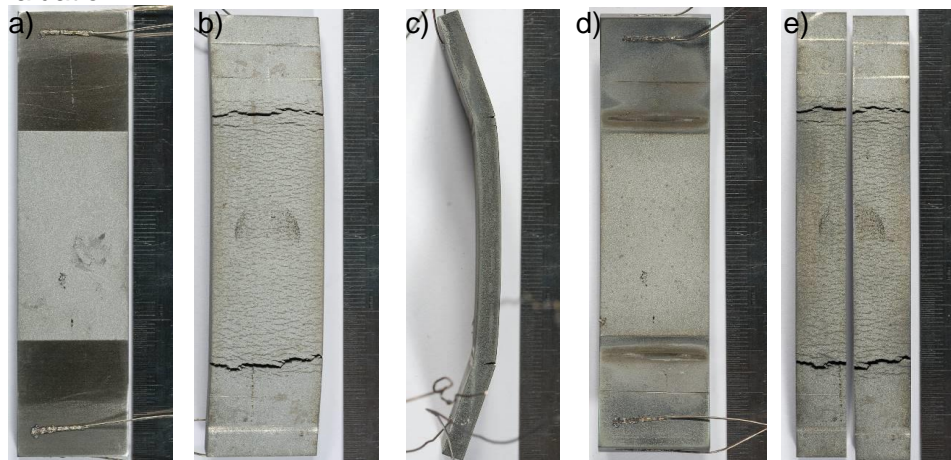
Cr-BS2 – a) As-coated and welded with probes; b) Bottom view – coated surface under tension; c) Side view after the test – reduced creep in comparison with Zry-4; d) Top view - coated surface under compression; e) Longitudinal cut for crack analysis.
